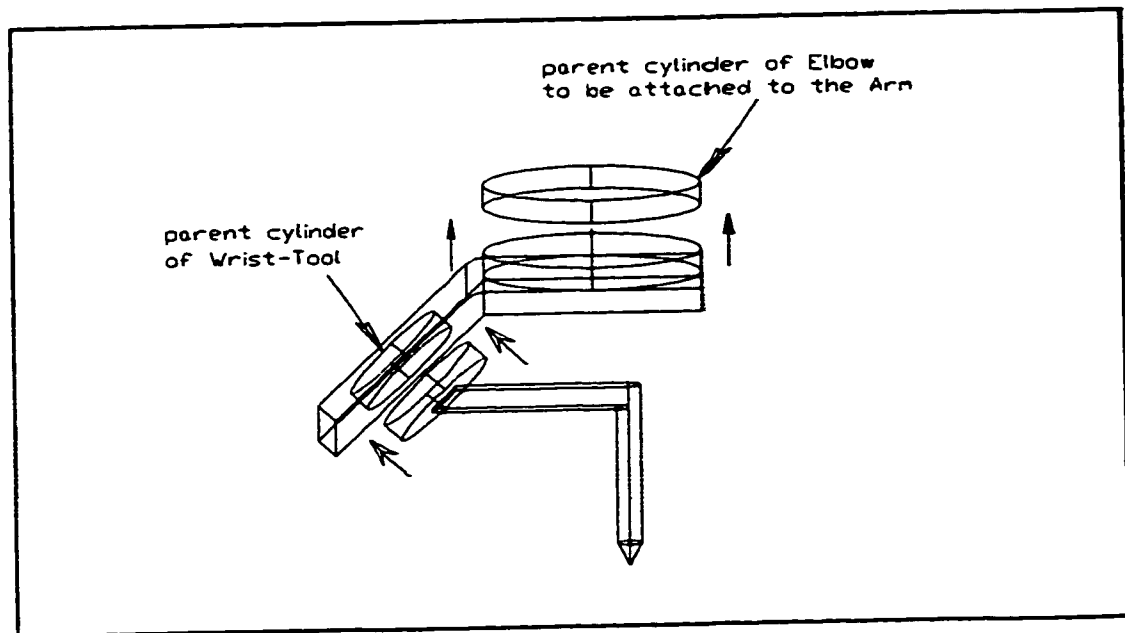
Assembly of the Elbow and the Wrist-Tool
